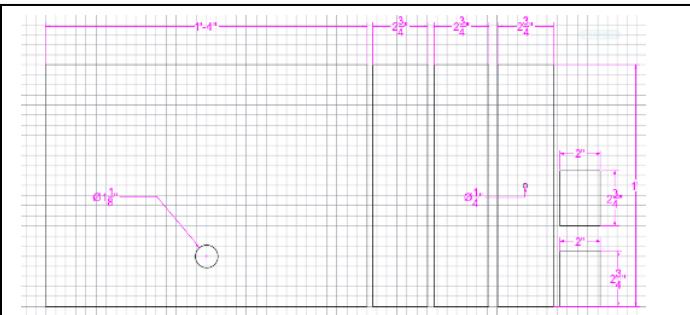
AutoCAD drawing of each piece of wood to be laser cut.
